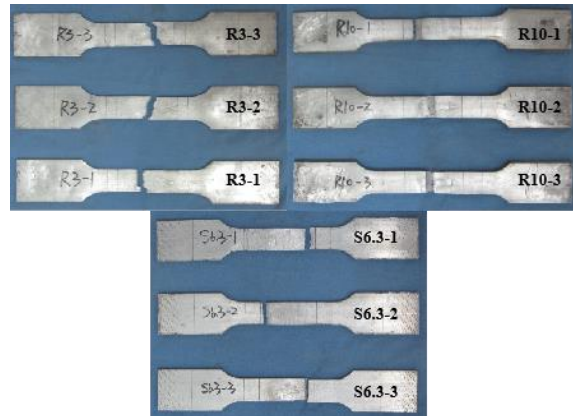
The failed tensile specimens of 6061-T6 aluminum alloy
